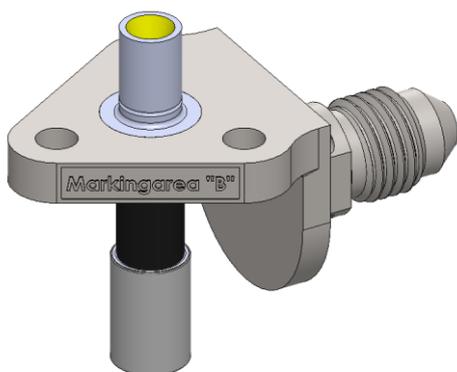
CAD drawing of AST's low-pressure coldgas thruster
